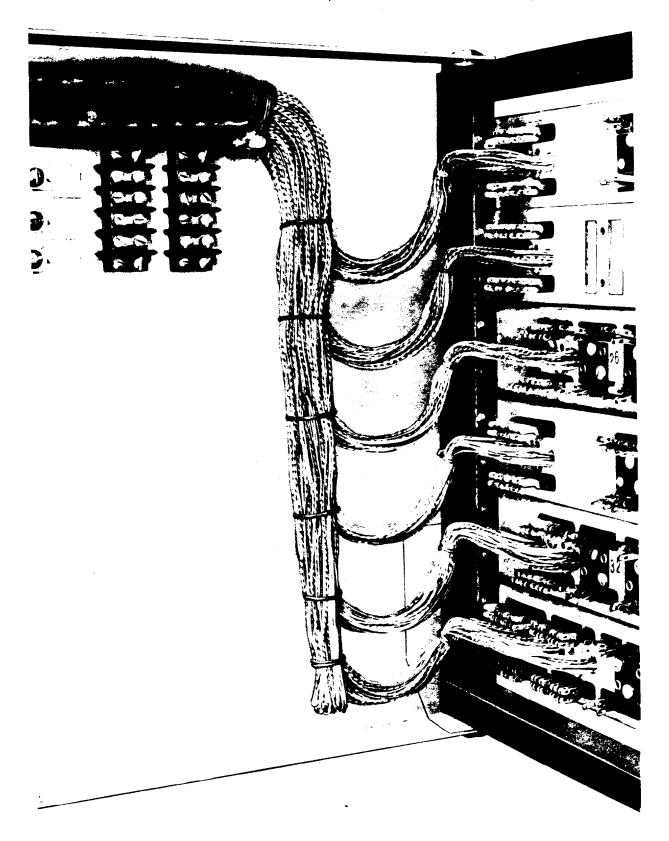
Cabling of Units in 6-Plate Cabinet per ED-95021-01—Gate Open—Front View
